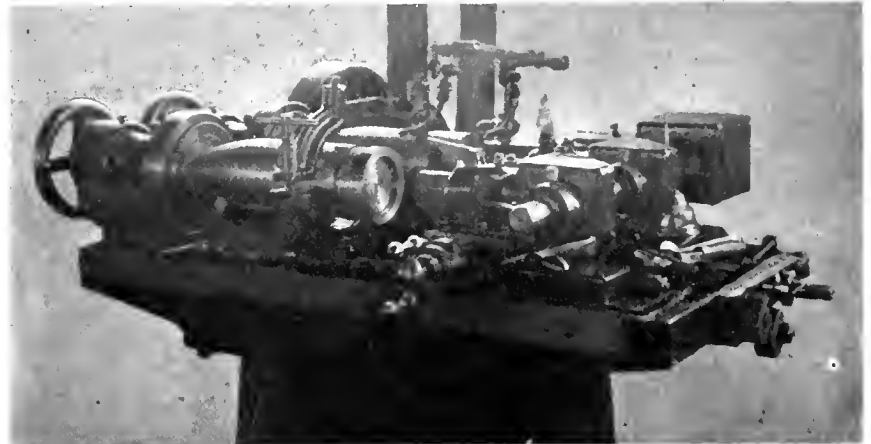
DUPLEX AUTOMATIC THREAD MILLING MACHINE
